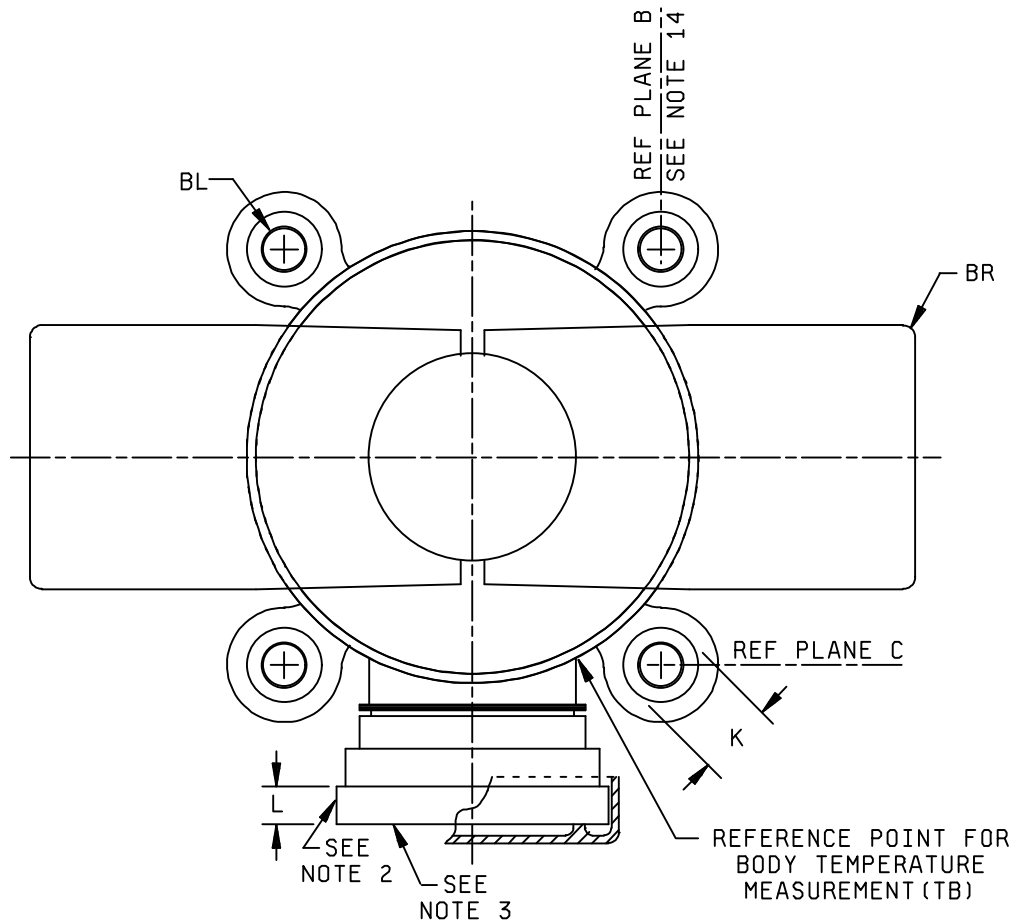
A. Alternate outline drawing of electron tube type DOD-042 (top view).
